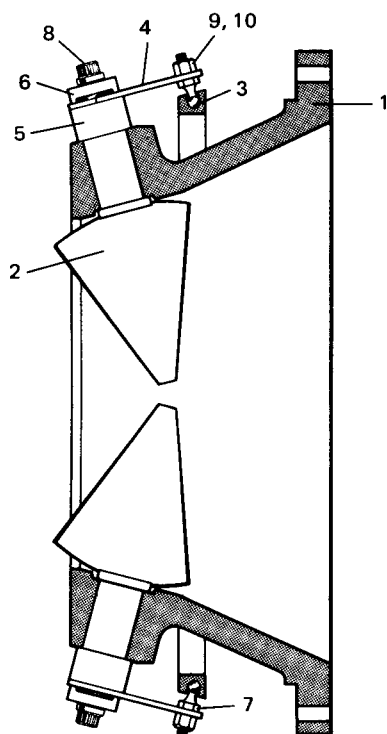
PREROTATION VANE CONTROL SHAFT REMOVED (SAME ASSEMBLY
